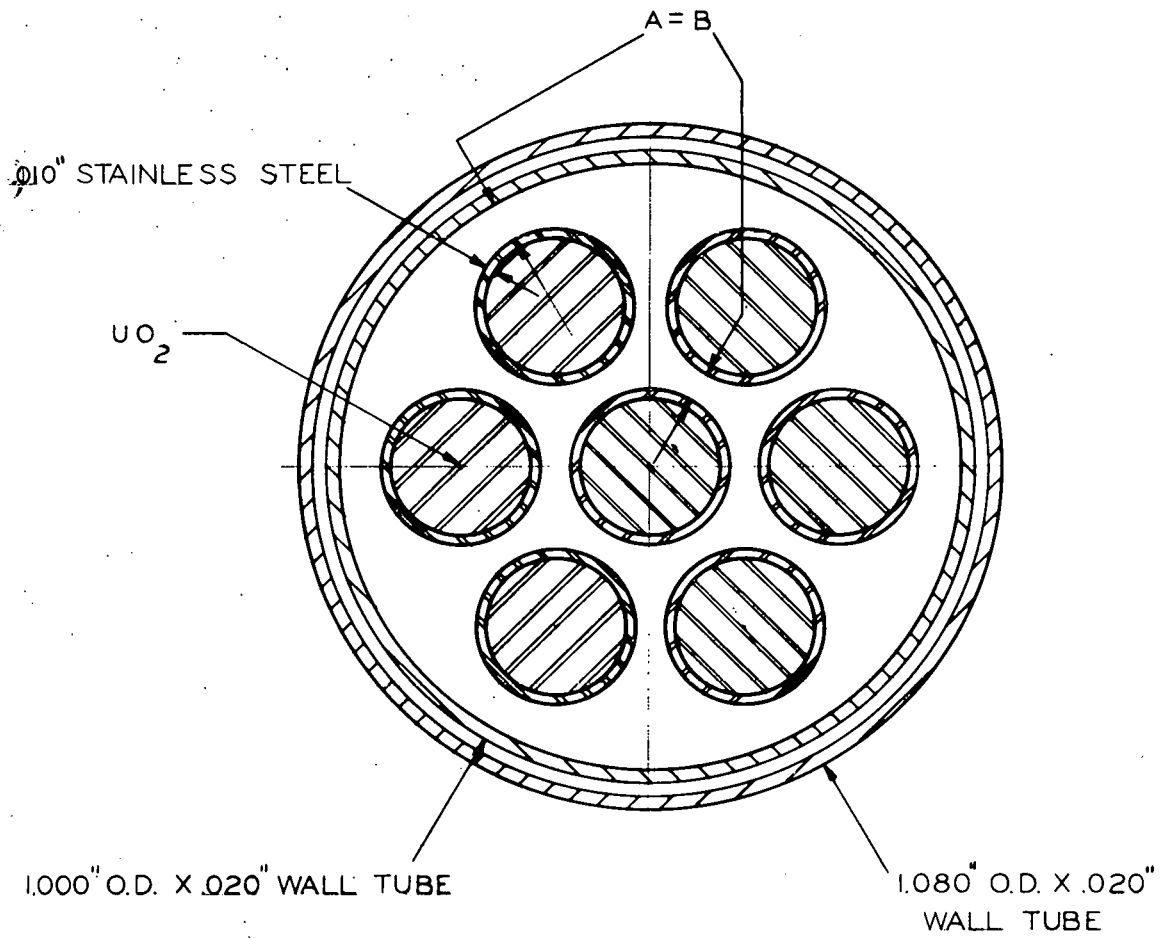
Proposed Low Enrichment Superheater Fuel Rod Bundle (43-024-085)
